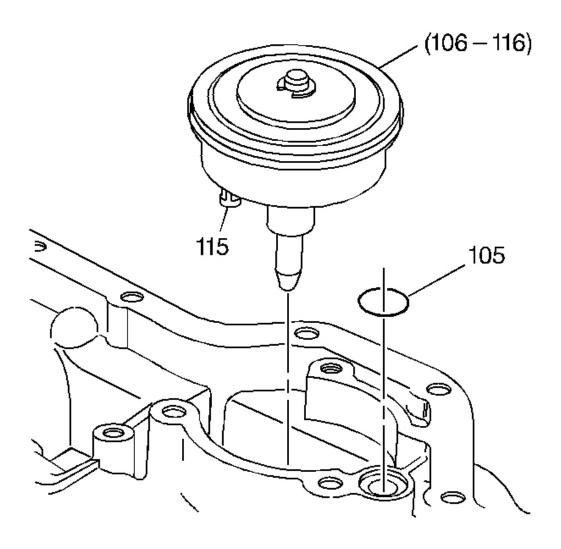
Identifying 2-1 Manual Band Servo Assembly Courtesy of GENERAL MOTORS CORP.
